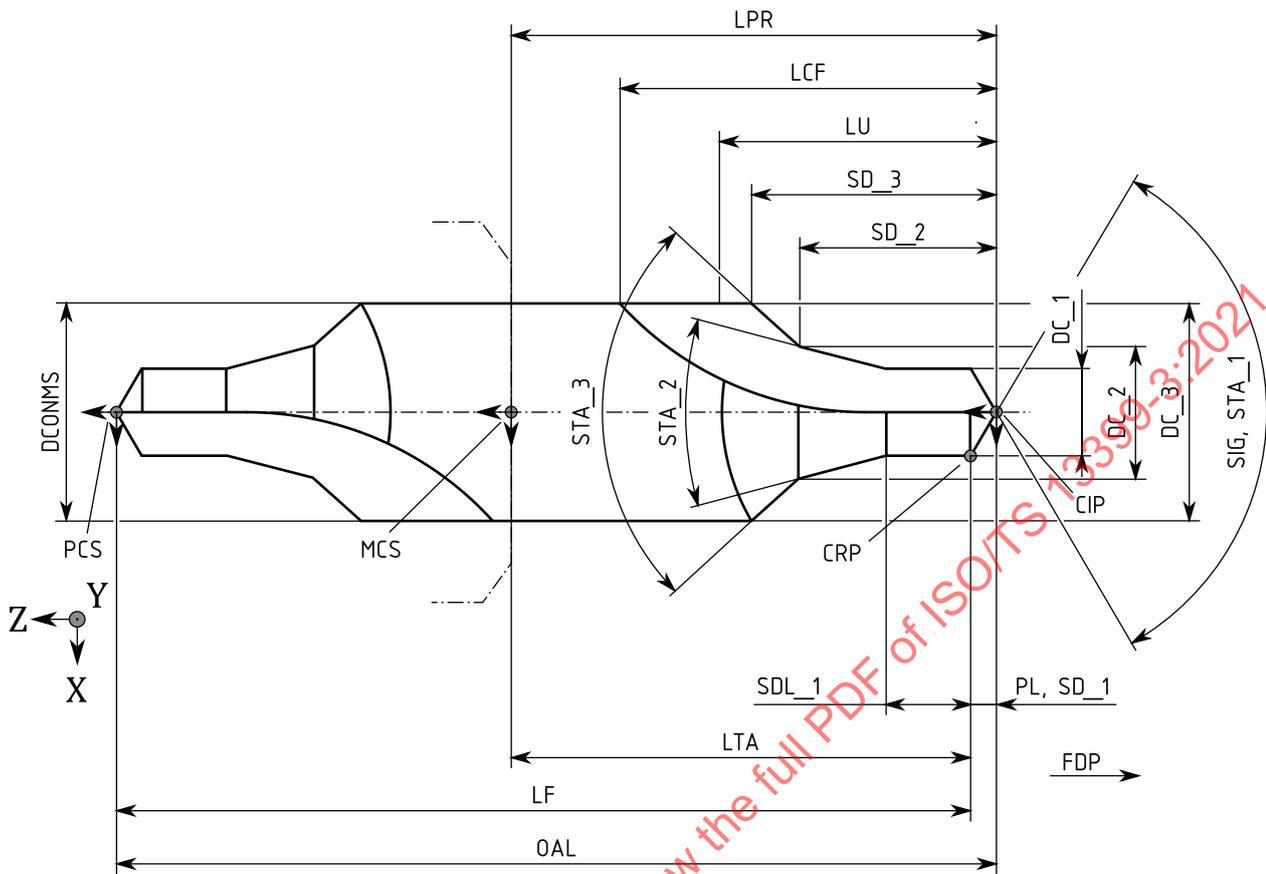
ISYC 302-07 - Centre drill, type B, solid
